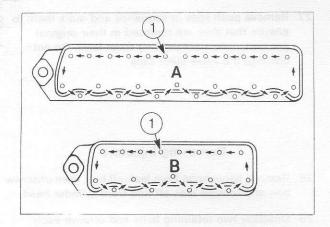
Cylinder Head Bolts Tightening Sequence
